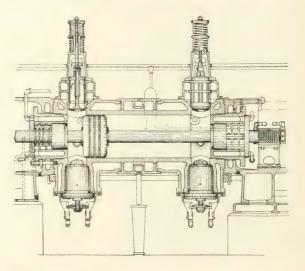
SUCTIONAL VIEW, MODERN HORIZONTAL GAS ENGINE CYLINDER
